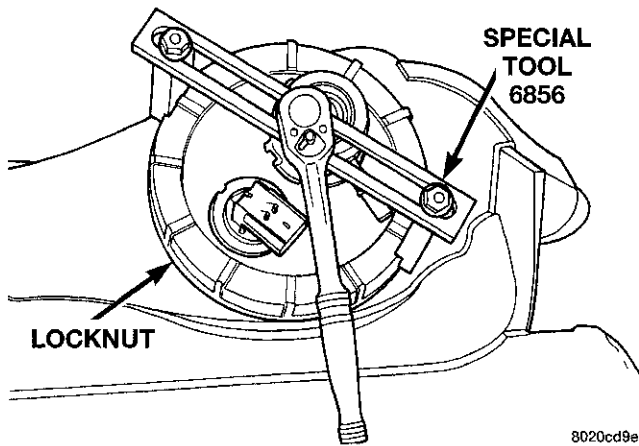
Locknut Removal/Installation—TYPICAL MODULE
